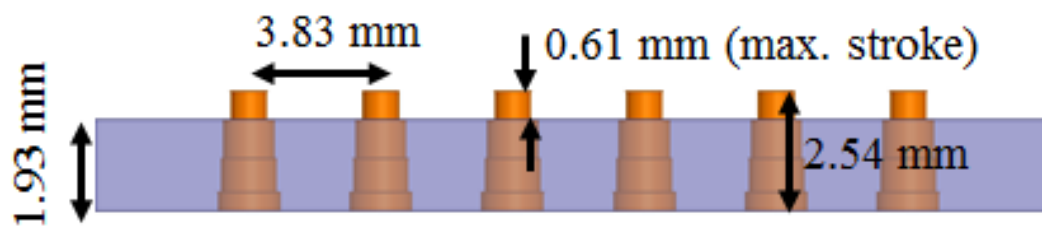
Side view of the LTCC interposer with critical dimensions (mm)
